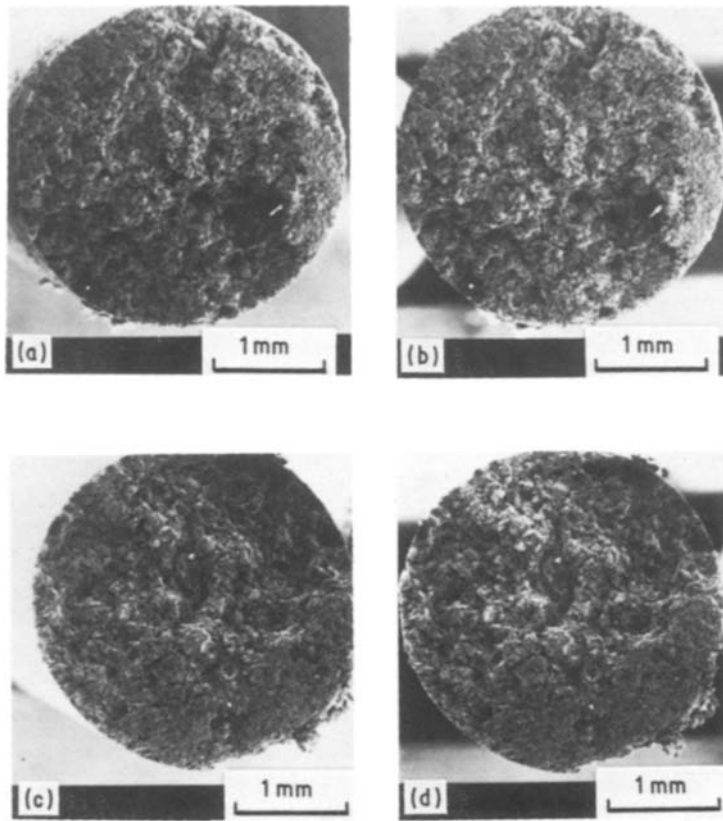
Stereomicrographs of fracture surfaces: (a, b) top surface, (c, d) bottom surface.
